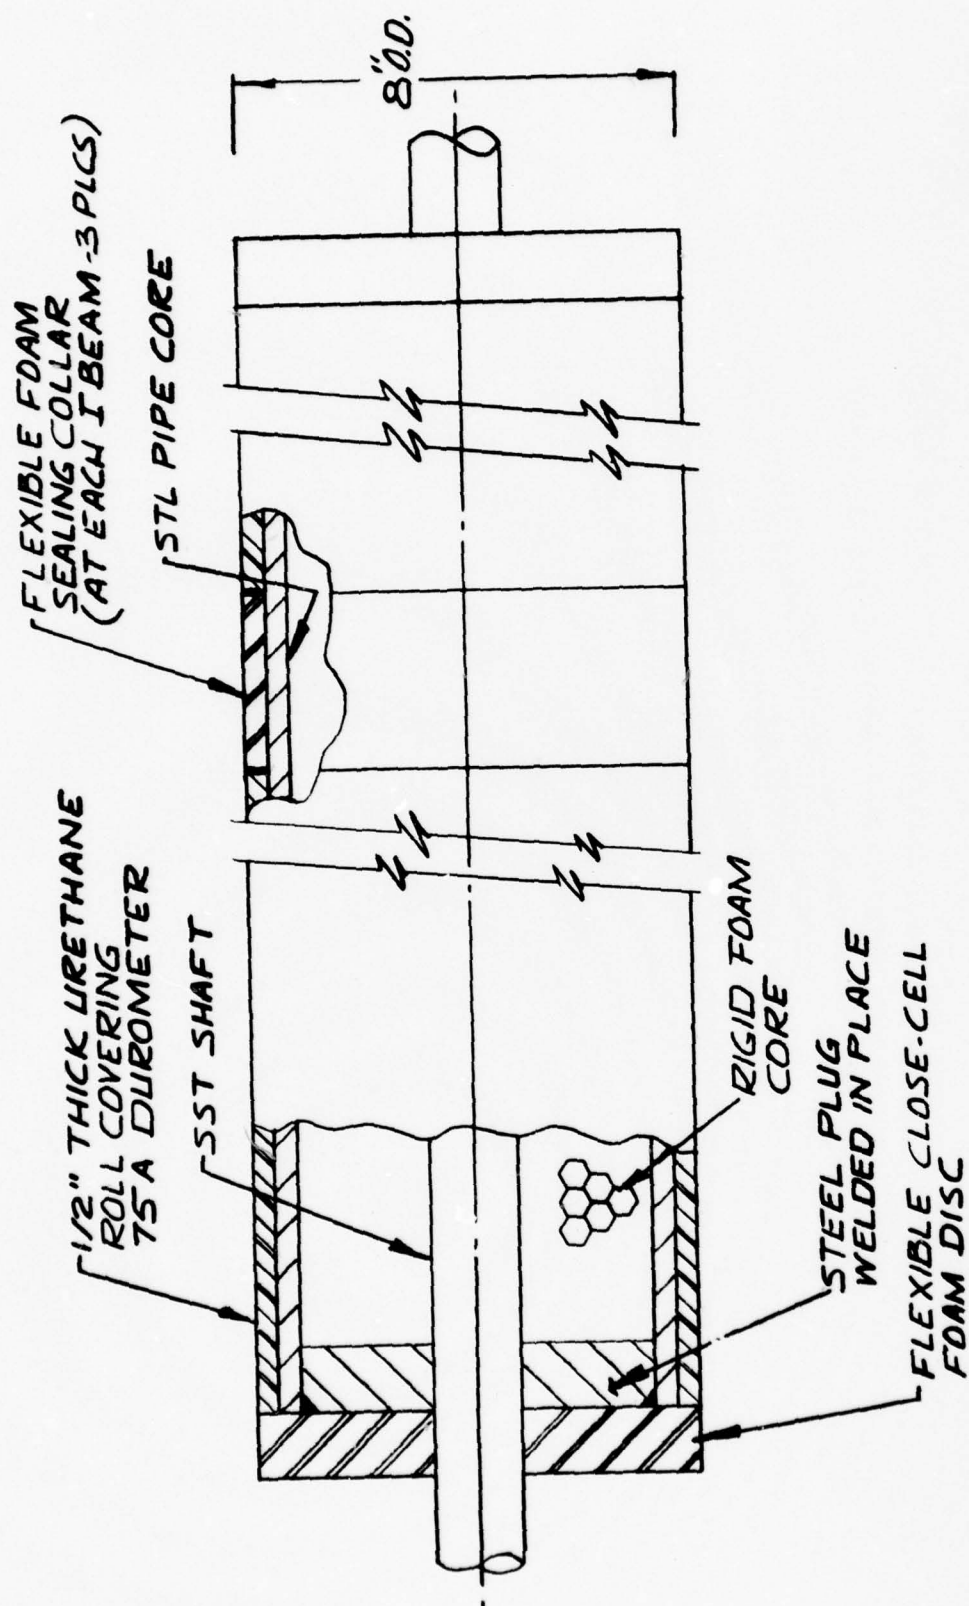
SQUEEZE ROLLER CONSTRUCTION
